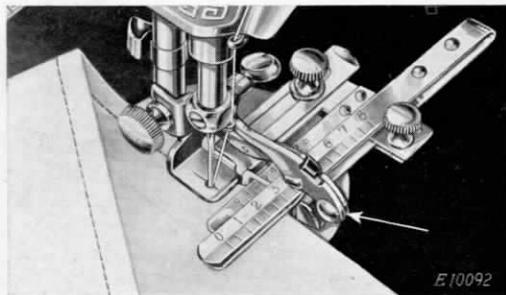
PROPER POSITION OF MATERIAL IN TUCKER
